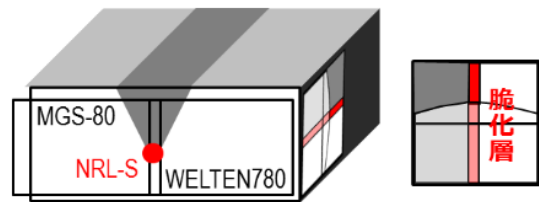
Welded joint which is likely to occur pop-ins developed by Imai [5]
